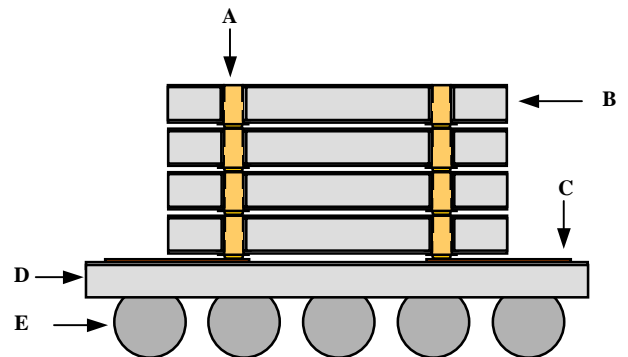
Schematic illustration of chip stacking for 3D packaging. (A) Through chip Cu plug (B) Thinning chip (C) Pad (D) Interposer (E) Solder ball.
